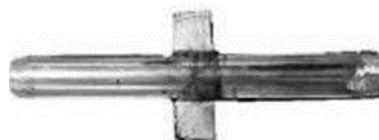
Fracture surface of specimen with 1.5% interference fit with pressed pin under fatigue load
